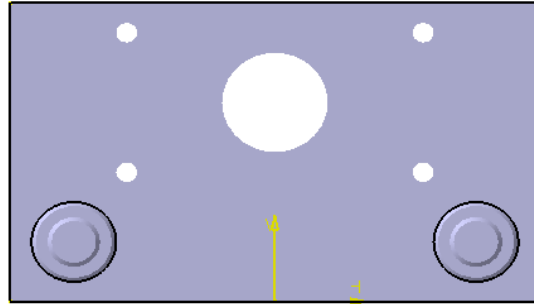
Sketch of the Pad feature for creating Top Plate
